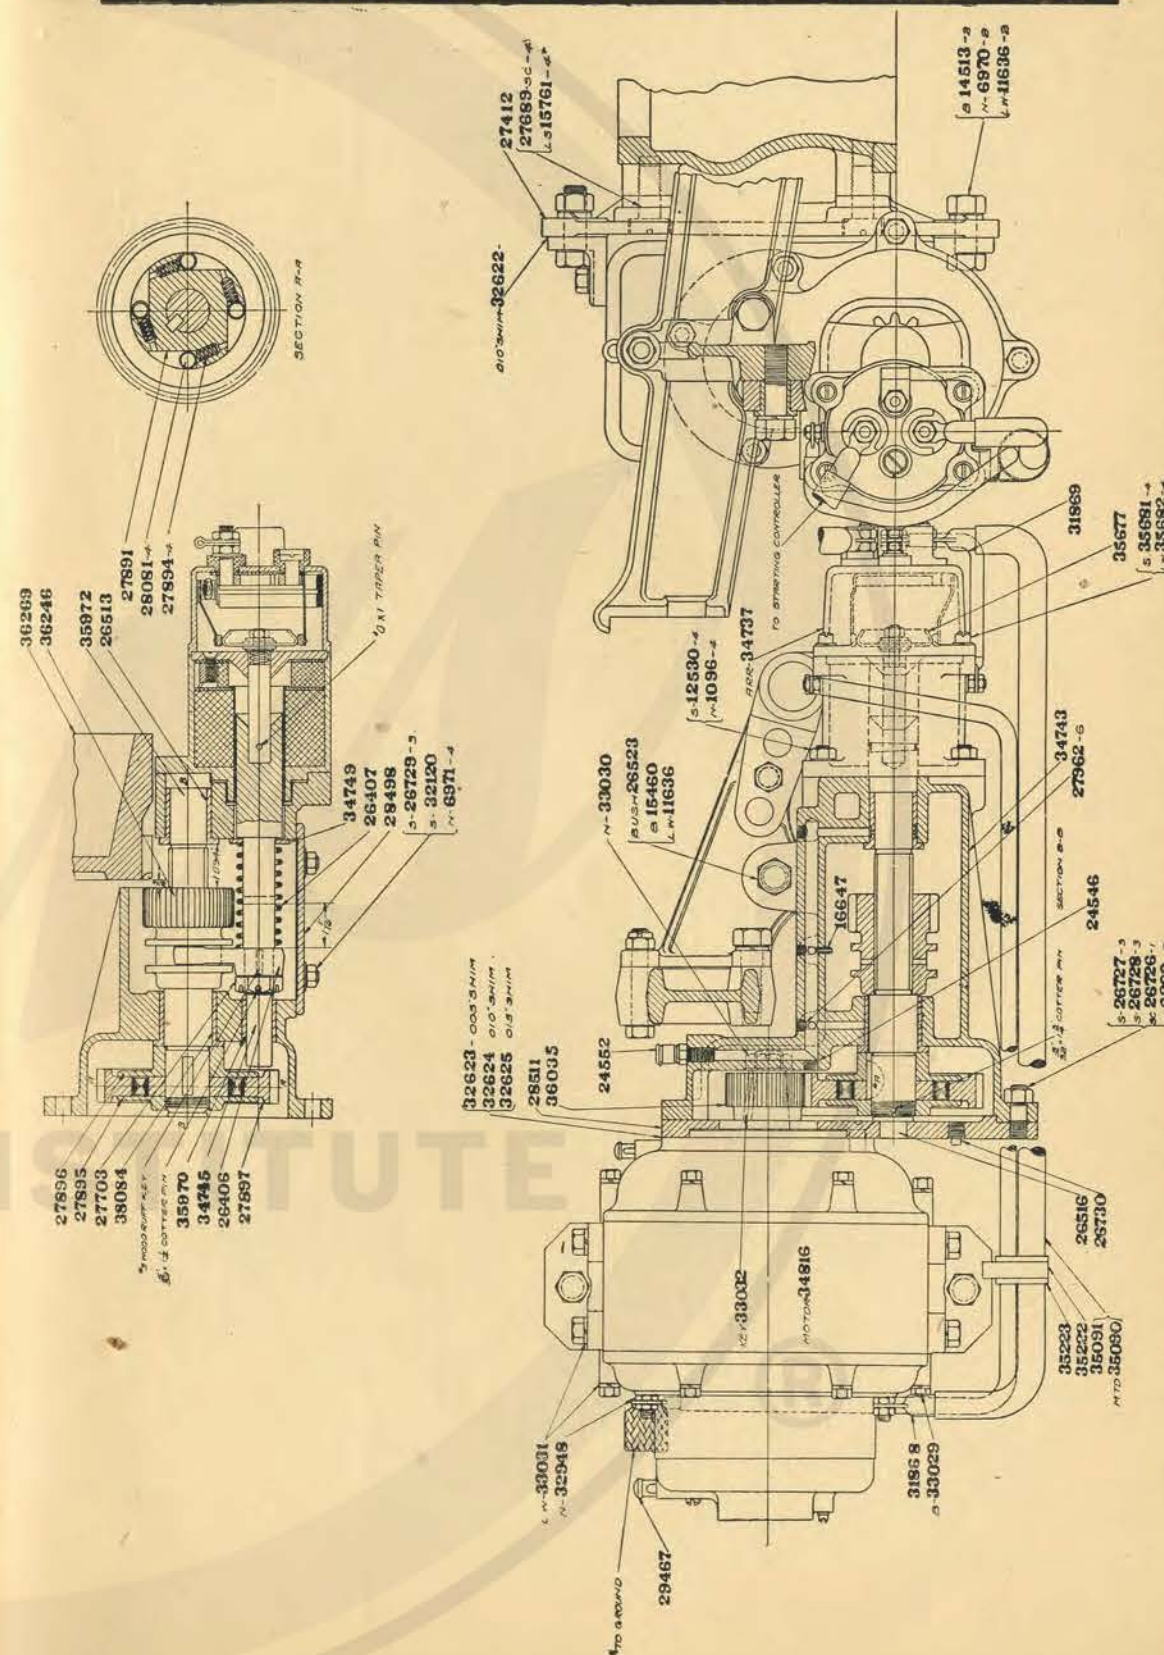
Side View of Electric Starting Motor, showing arrangement of Gearing, Free Clutch and Starting Switch.
